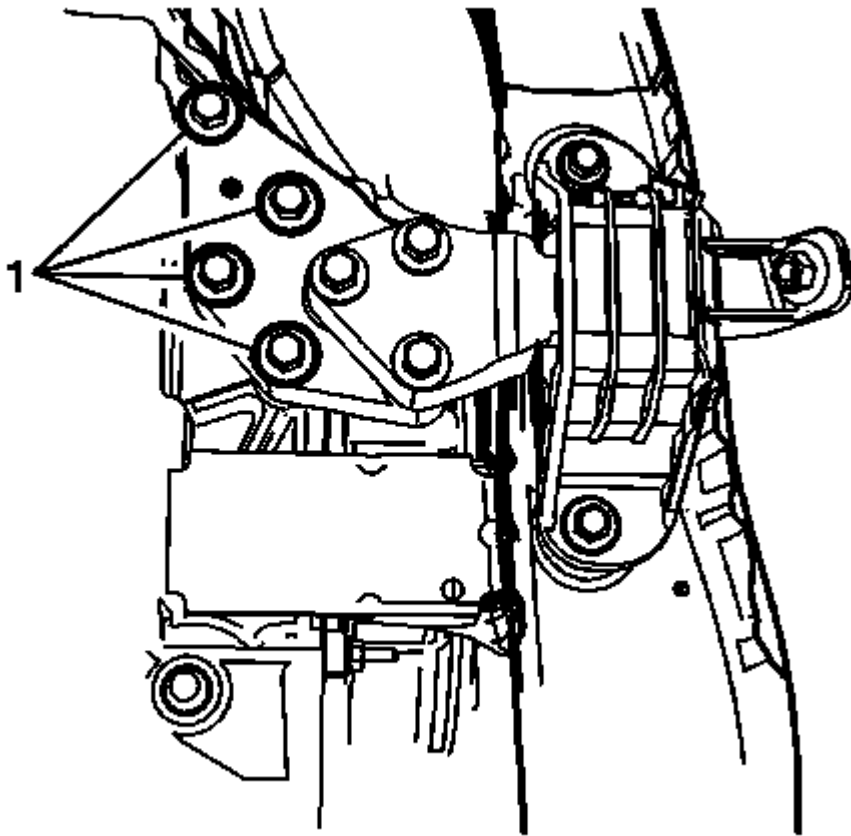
Rear Transaxle Mount Through Bolt
